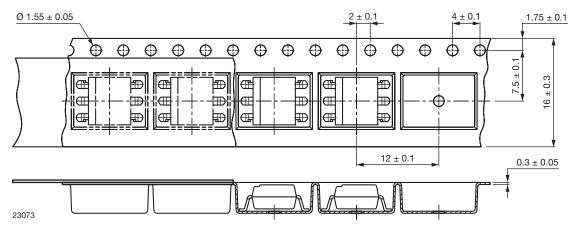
Tape and Reel Packaging (1000 pieces on reel)
